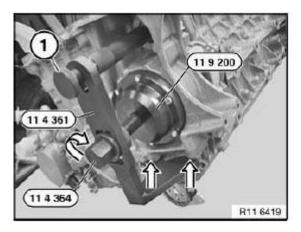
Identifying Knurled Screw And Special Tools Courtesy of BMW OF NORTH AMERICA, INC.
